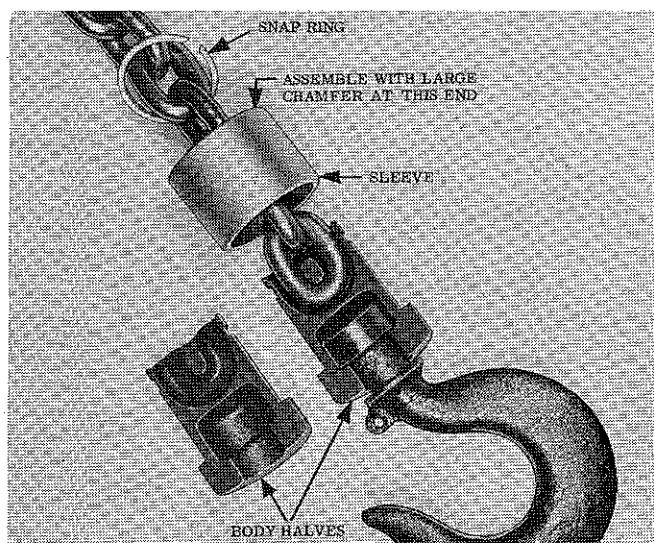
Lower Hook Connection - Current 1-1/2 Ton Model Hoists
